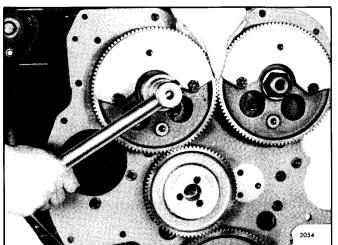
Removing or Installing Nut on Camshaft or Balance Shaft
